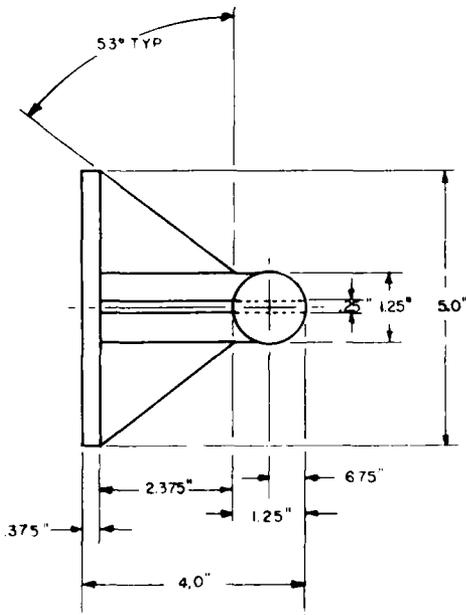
FSM pole mount; unless otherwise specified, tolerances are  $\pm .002$
